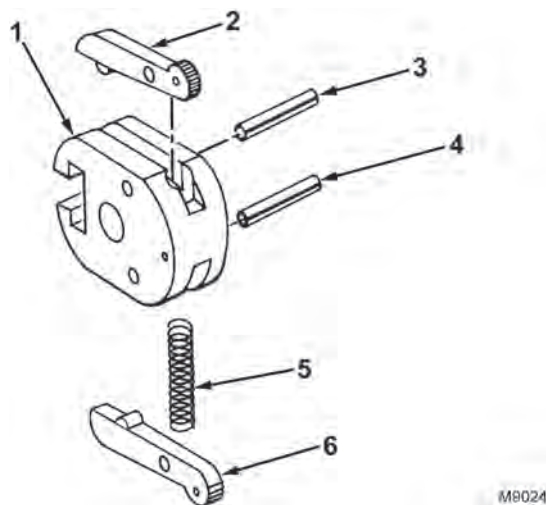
M9 Multipurpose Bayonet System Latch Assembly.
